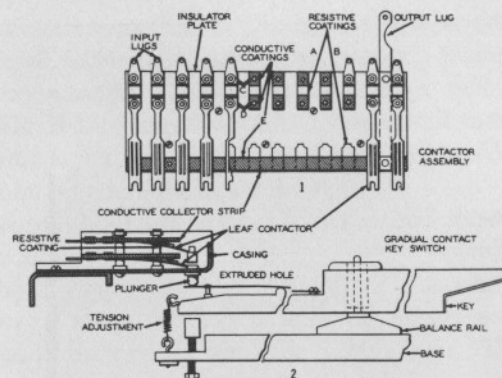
Drawing shows construction of the Baldwin key switches.
